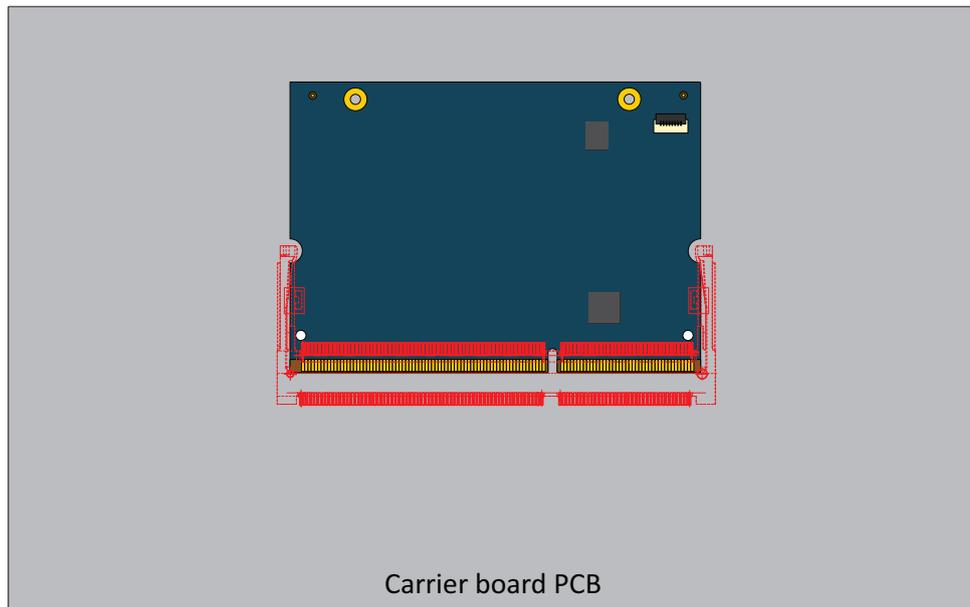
PCB footprint of the SOM DDR3 SODIMM slot with SOM-6X50 module
